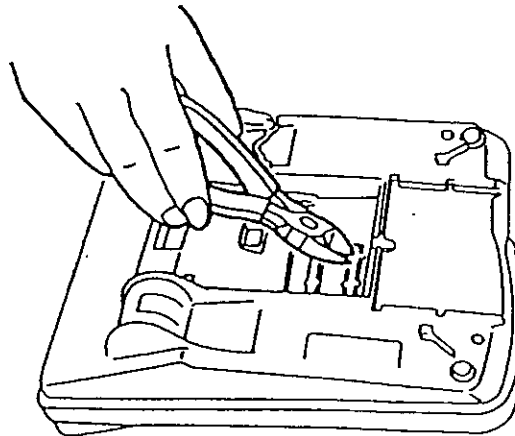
Removing the Knockouts to Install an ADA(1)-W(GG) Unit or ADA(2)-WA(GG) Unit
